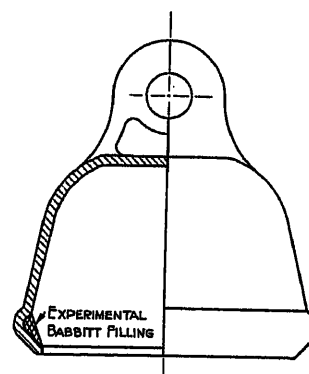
CAP WITH BEARING SURFACE FILLED WITH BABBITT TO DESIRED ANGLE
